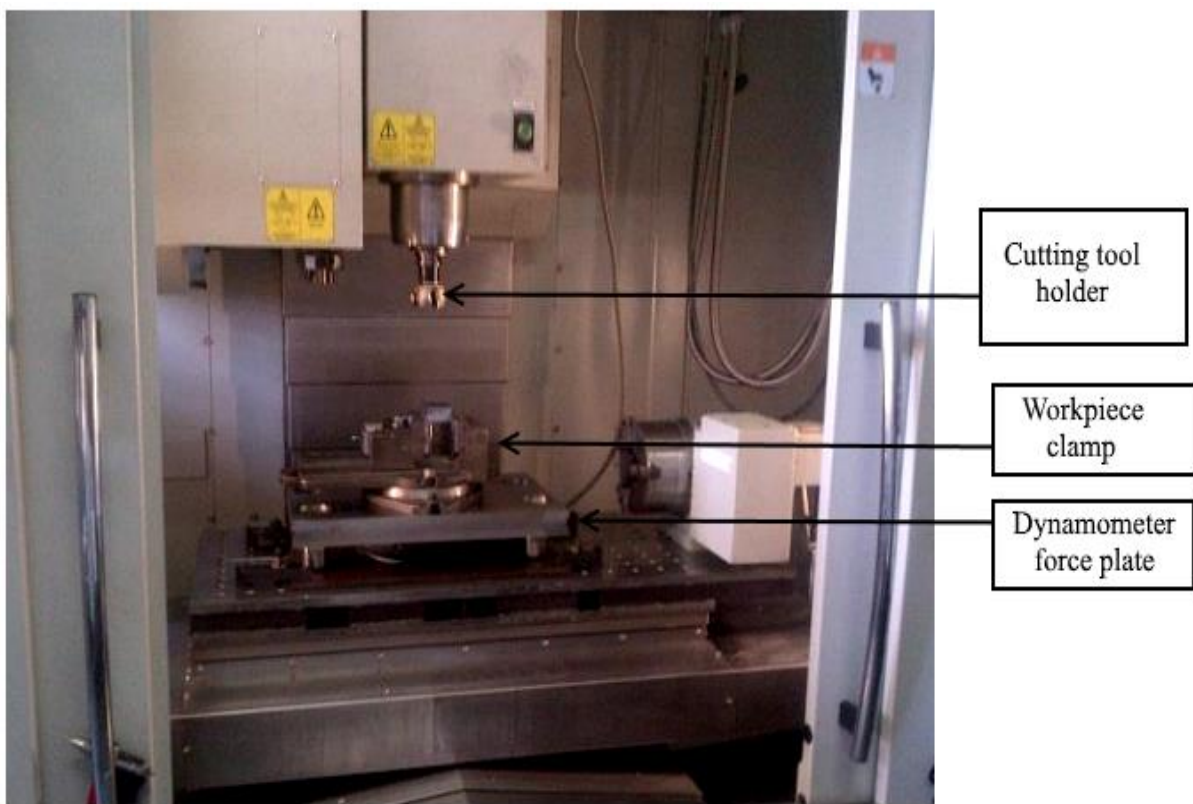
Overview of Bridgeport GX1000 CNC Machine with attached cutting tool holder, workpiece clamp, and dynamometer force plate
